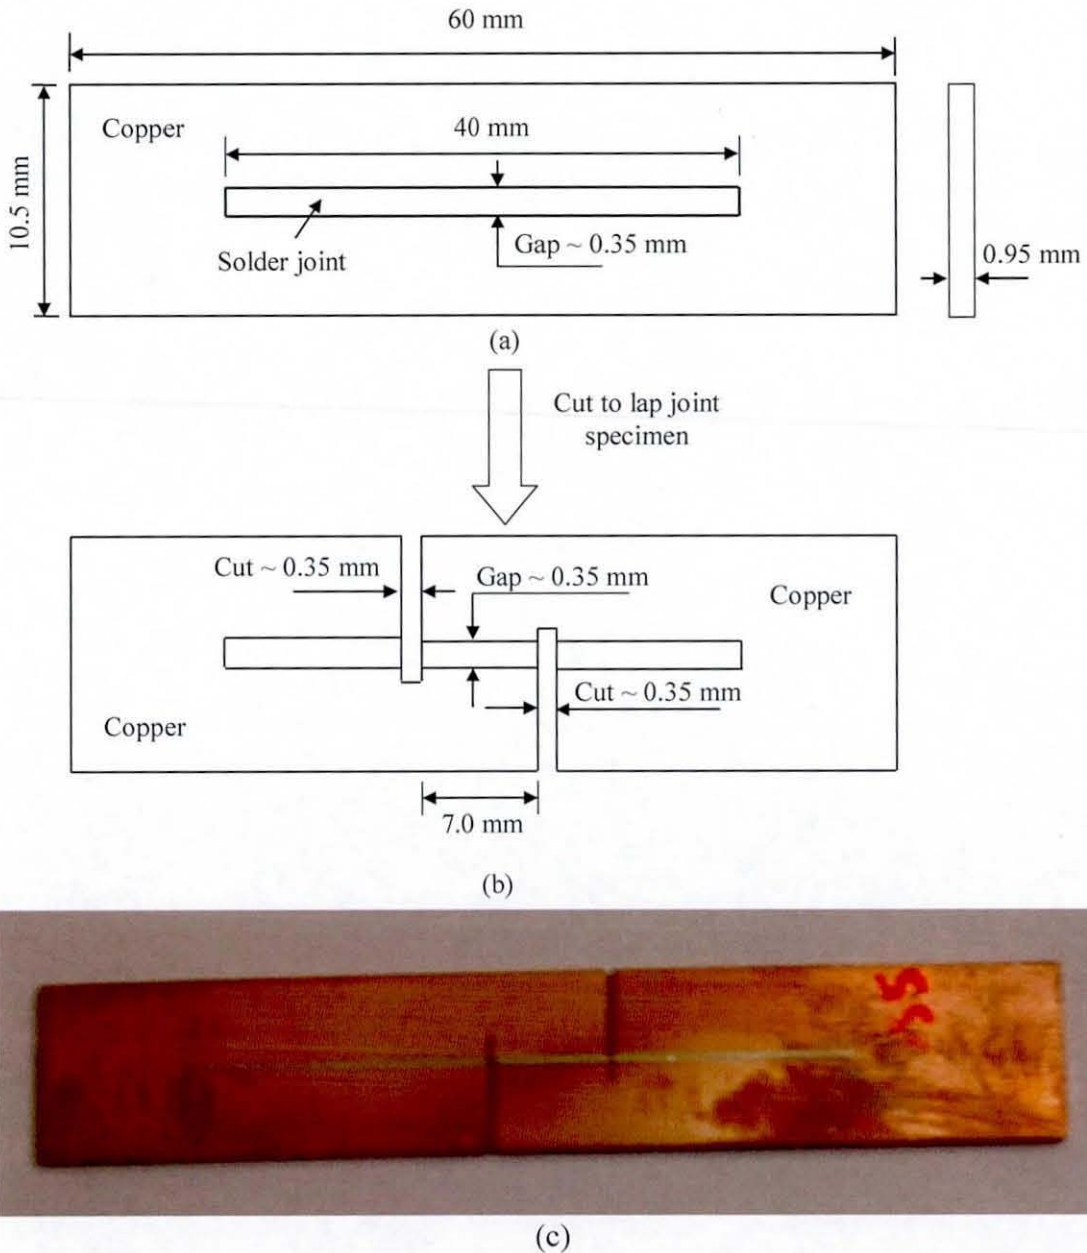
Fabrication of lap solder joint: (a) copper specimen after formation of solder joint and grinding; (b) final shape of specimen; and (c) actual specimen after final polish
